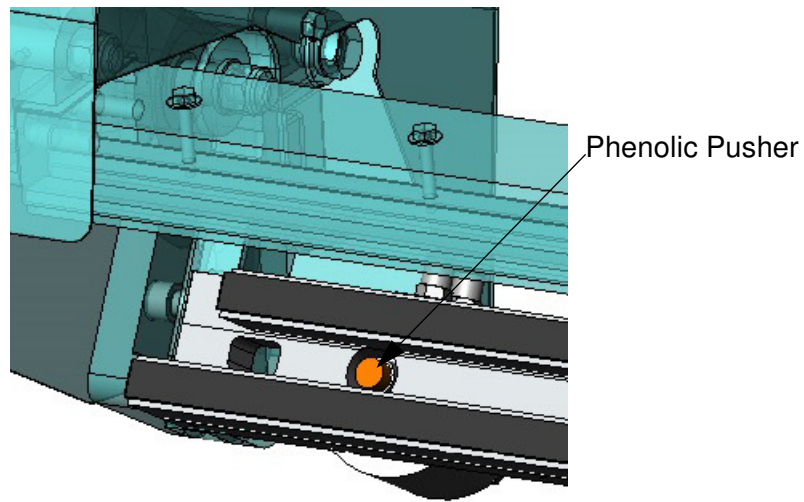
Pancake Cylinder Pusher (Heat Bar removed)
